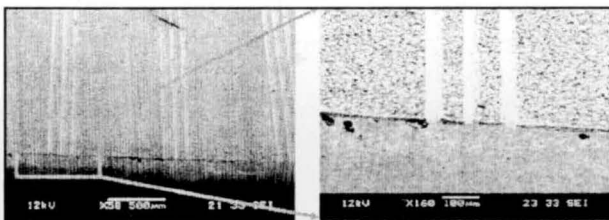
15µm Deep and 35µm wide Slots Machined by Micro-Milling Using PCD Micro Tool on PZT Substrate Coated with Ag.
